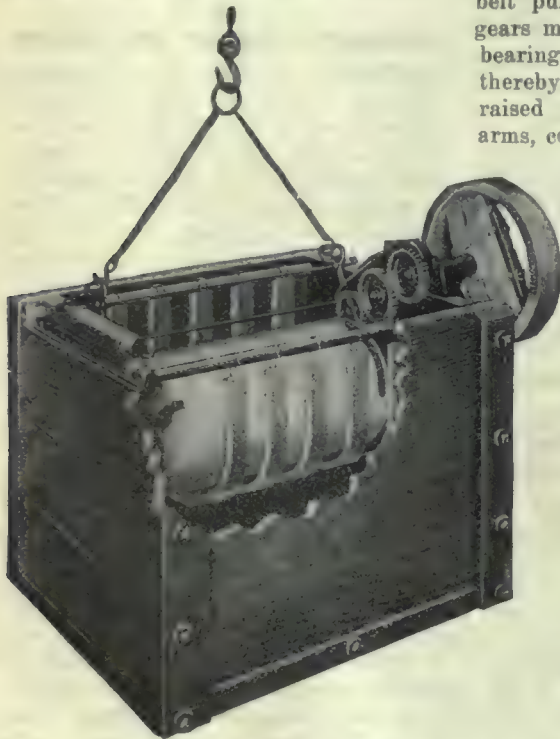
SECTIONAL VIEW OF PLATING MACHINE SHOWING BARREL IN POSITION SURROUNDED BY ANODES.
